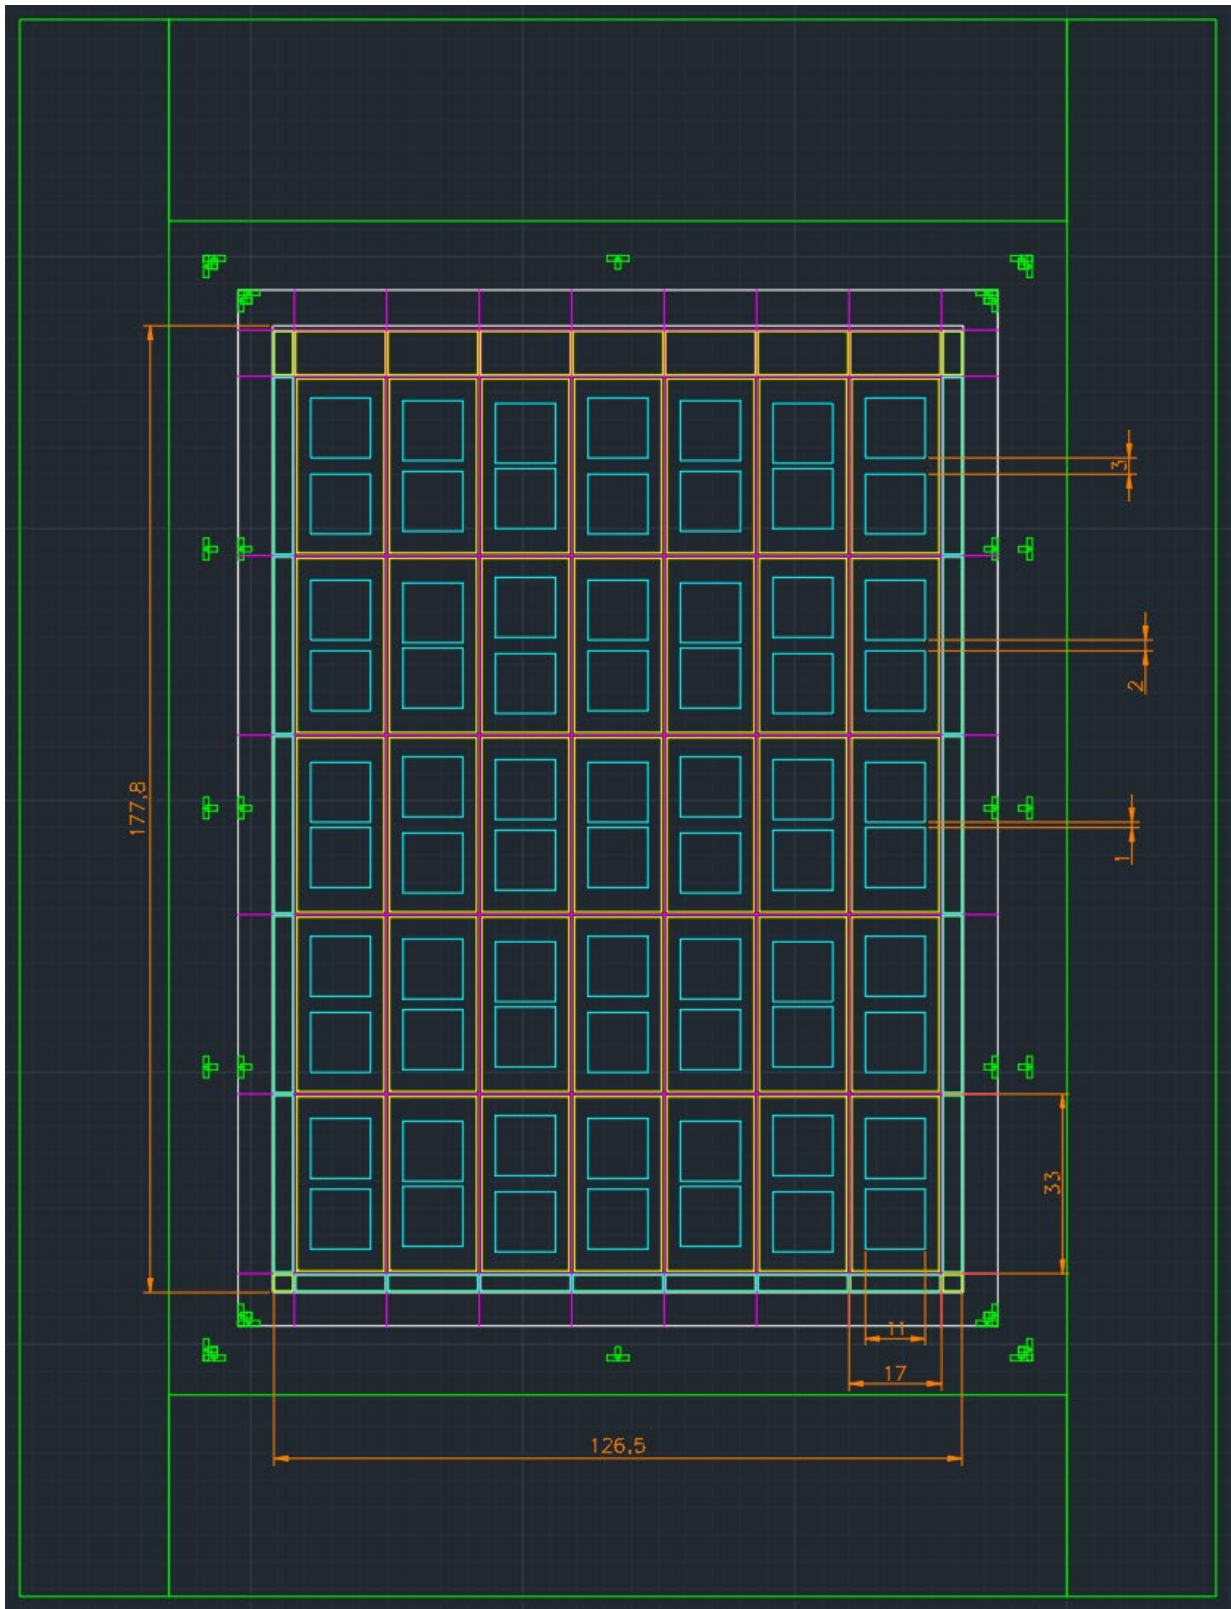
AutoCAD drawing of all layers of the patterns including top side copper, bottom side copper, and dicing lines.
